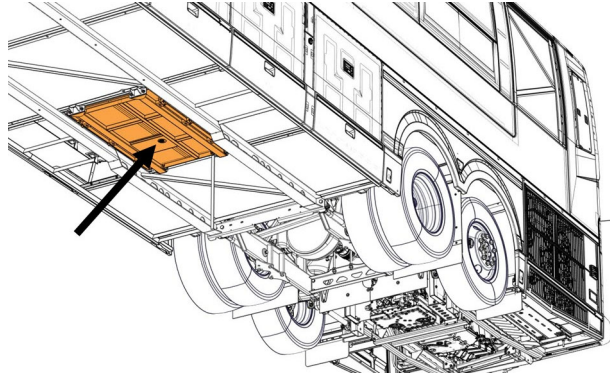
Fuel tank assembly location for H3-45 and H3-45 VIP
